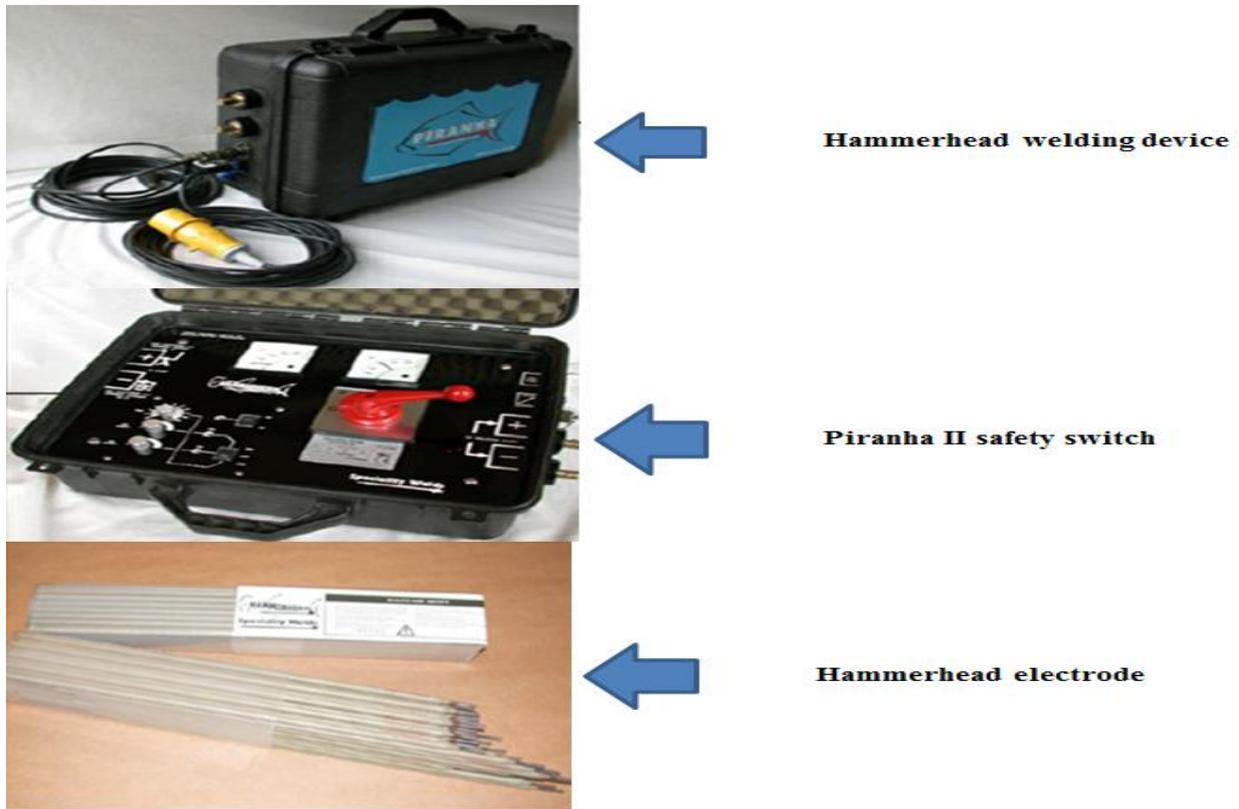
Hammerhead “wet-spot” welding device and electrodes. [70].
